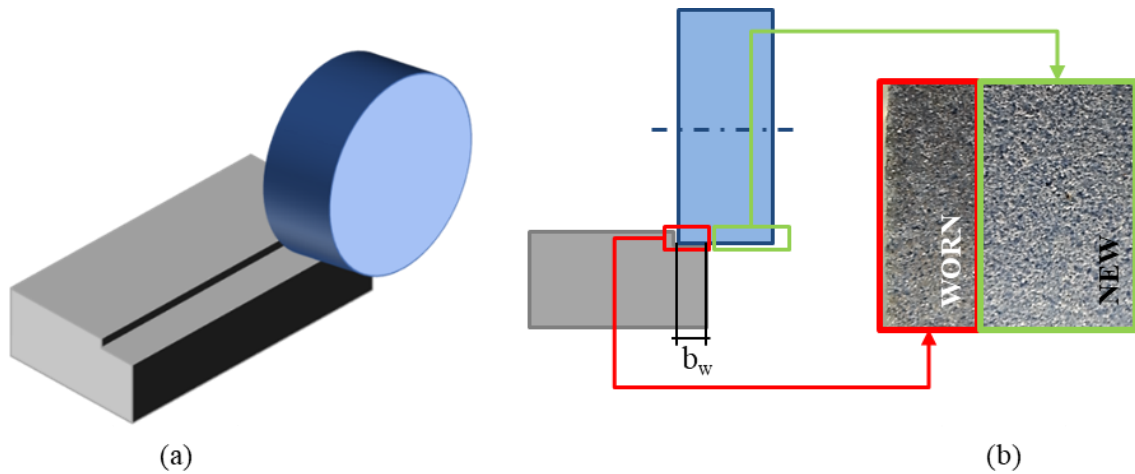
(a) Wheel-workpiece positioning during tests and (b) tests scheme in order to analyze just dressed and worn surfaces
